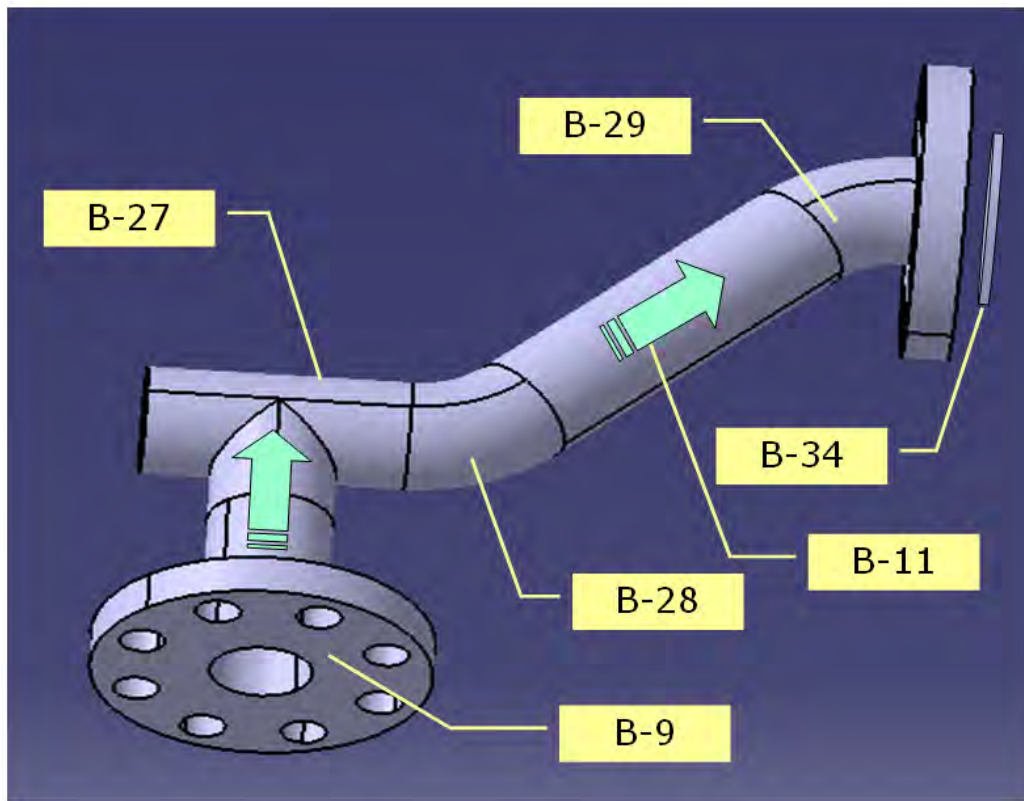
3D View of component #24 pipe with tee, elbow and valve
